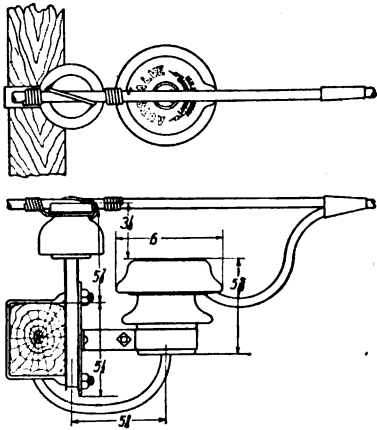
SIDE AND TOP VIEWS OF 2500-VOLT ARRESTER WITH FORM C MOUNTING BRACKET AND PIERCE CLAMP PIN
